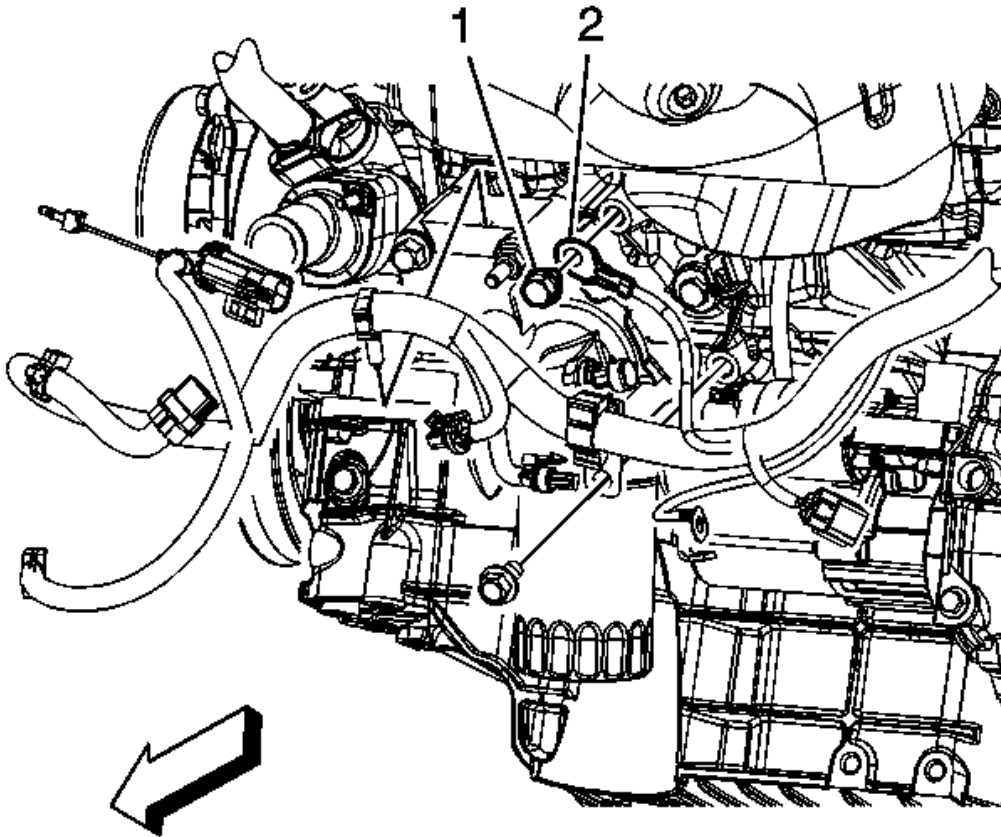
Identifying Engine Wiring Harness Ground Bolt
